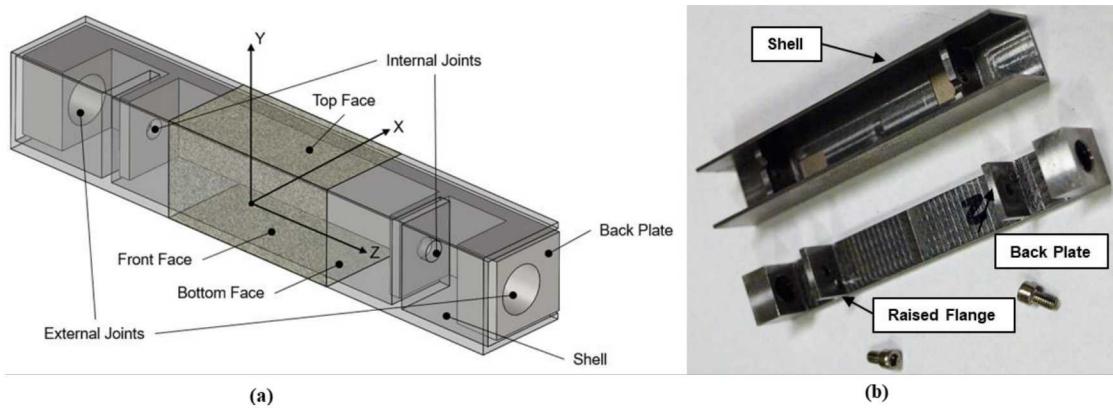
Model beam: a) schematic and b) photo showing the beam disassembled.
